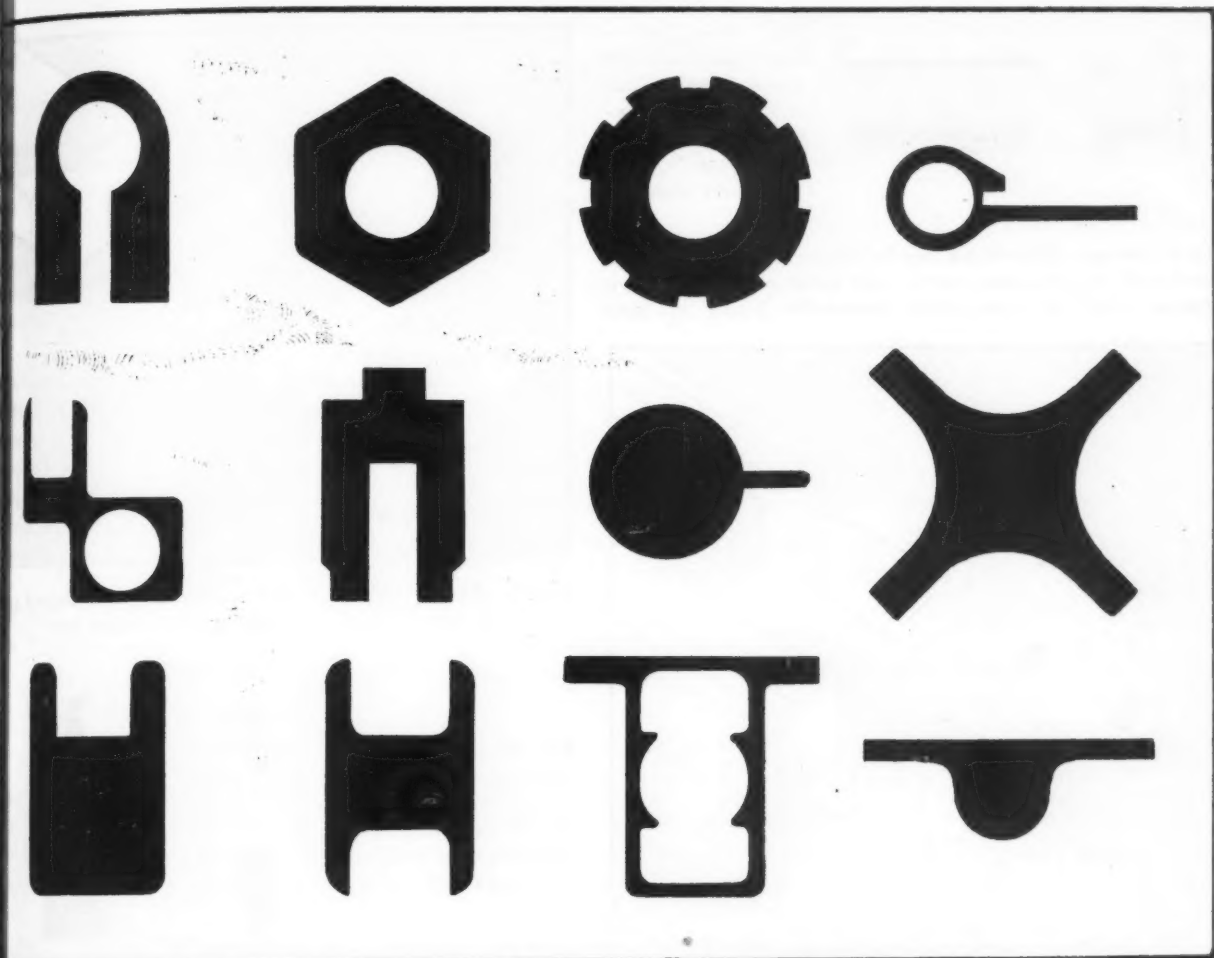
Above—Shapes shown are representative of the variety that can be made by means of extrusion and cold drawing for the production of machine parts
